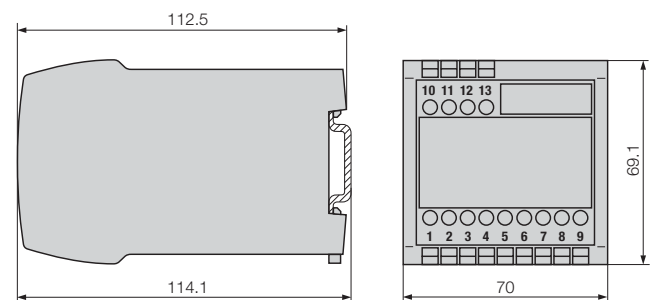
Housing P13/70 clipped onto a top-hat rail (35 × 15 mm or 35 × 7.5 mm, acc. to EN 50 022)
